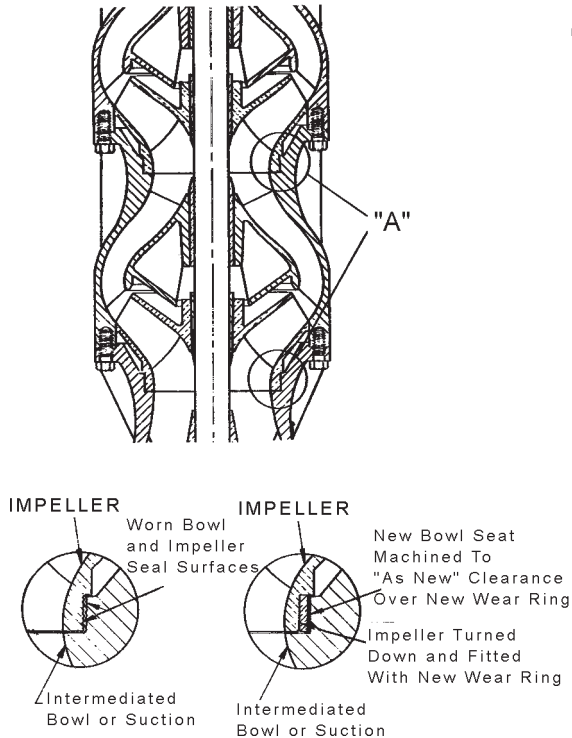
Repairing Enclosed Impeller and Bowl Seal Surfaces
